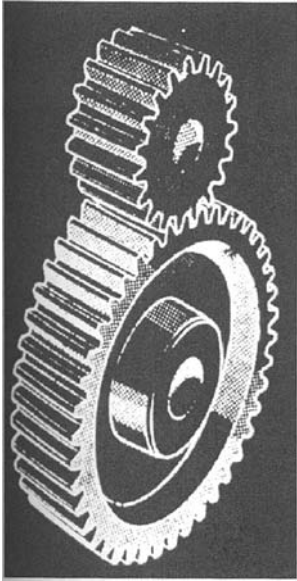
Spur gears. (Courtesy of Lubrizol Corp.)
